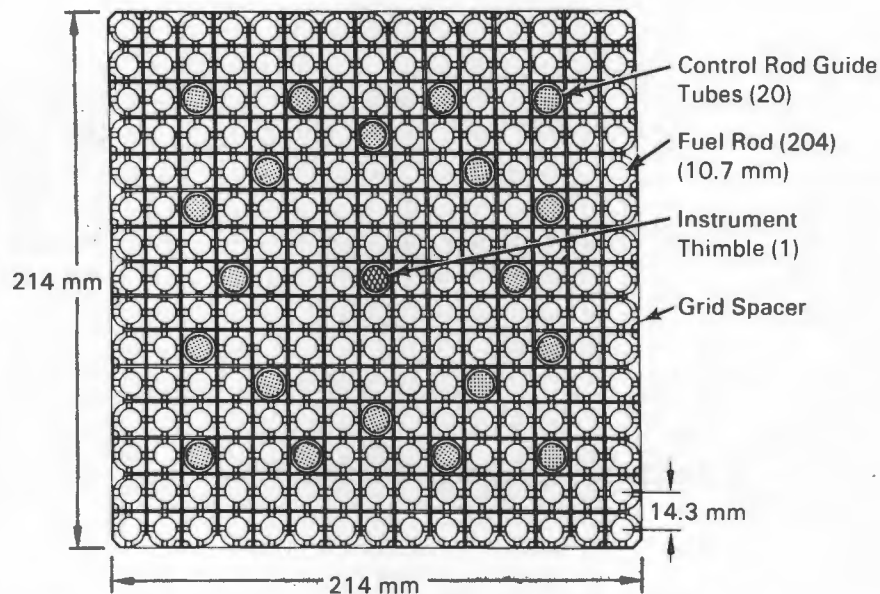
Surry and Turkey Point 15 x 15 PWR Fuel Assembly Cross Section
